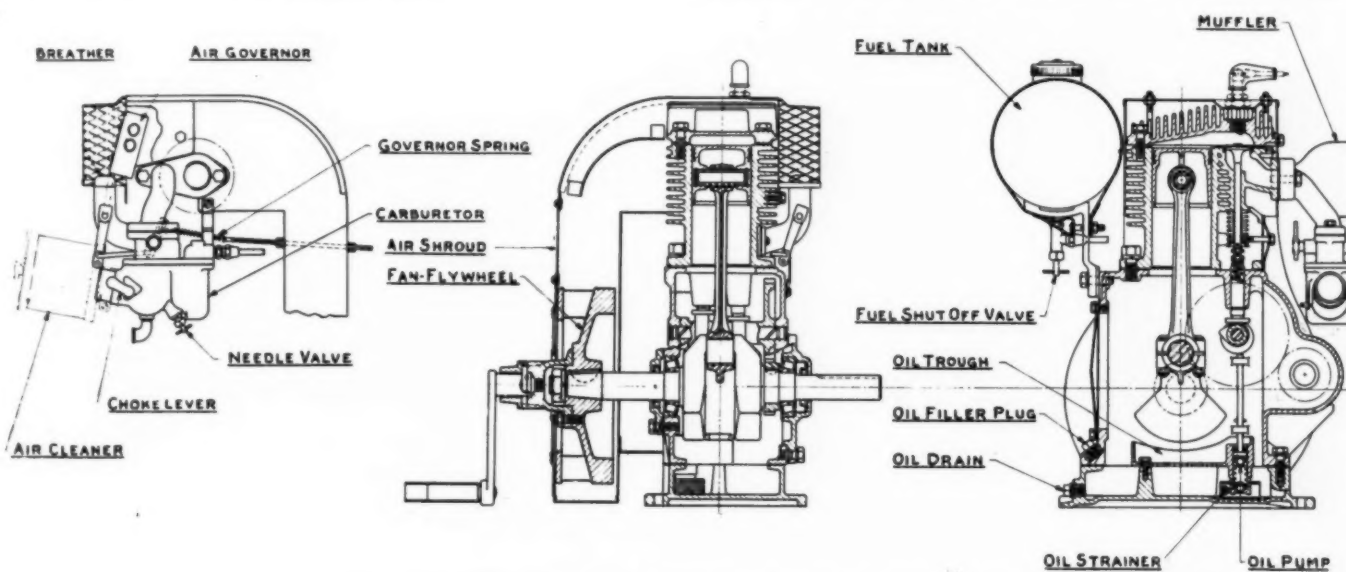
Cross-sectional views of a Wisconsin single-cylinder air-cooled engine, showing general construction and air cooling. To the left is a sketch of the carburetor, the air shrouding arrangement, and the air governor
